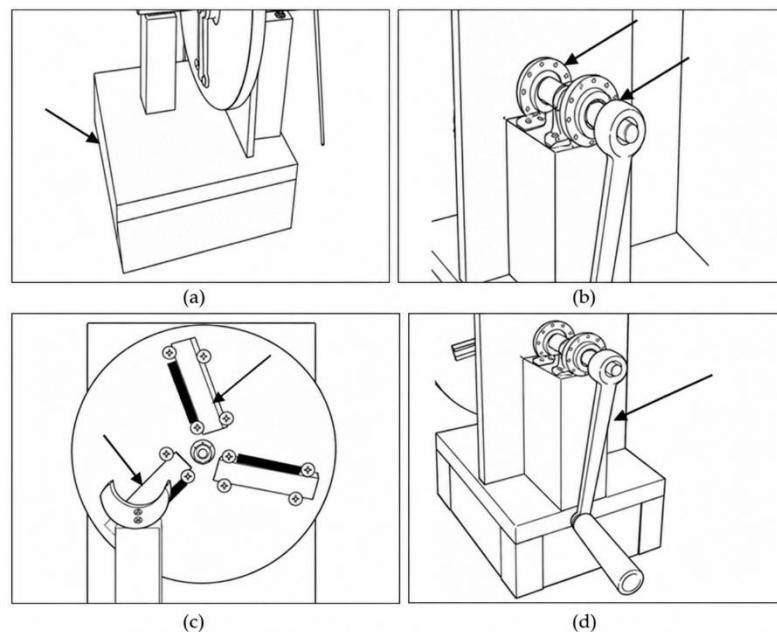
(a) Frame construction, (b) Shaft and hub installation, (c) Blade installation, (d) Pedal installation.
